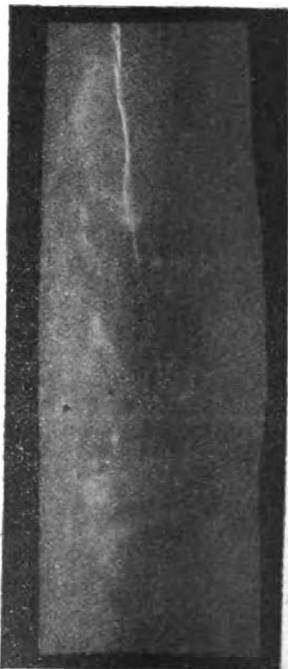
Defective Weld in  $\frac{1}{2}$  in. Steel Plate.
